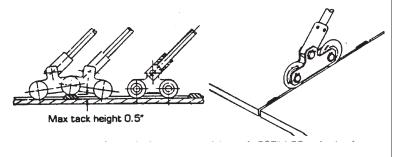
TIP SELECTION, TACK WELD OVER-RIDE
